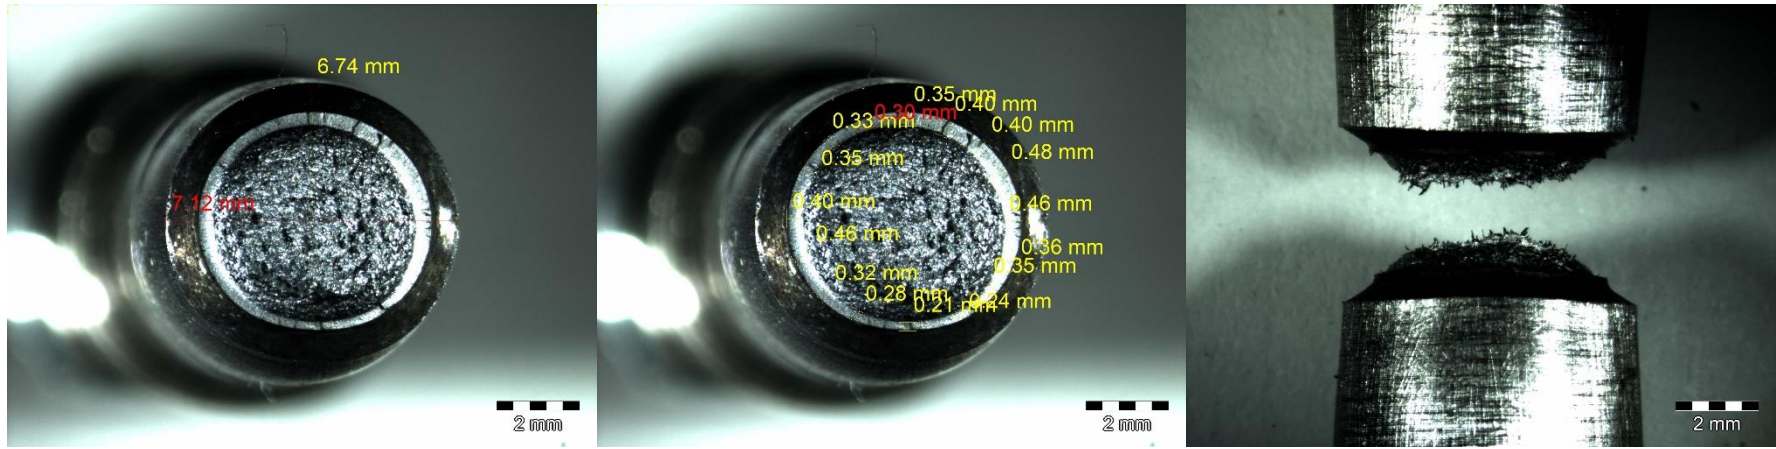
Cross-sectional and side view of fractured StxWSCCRB-02
